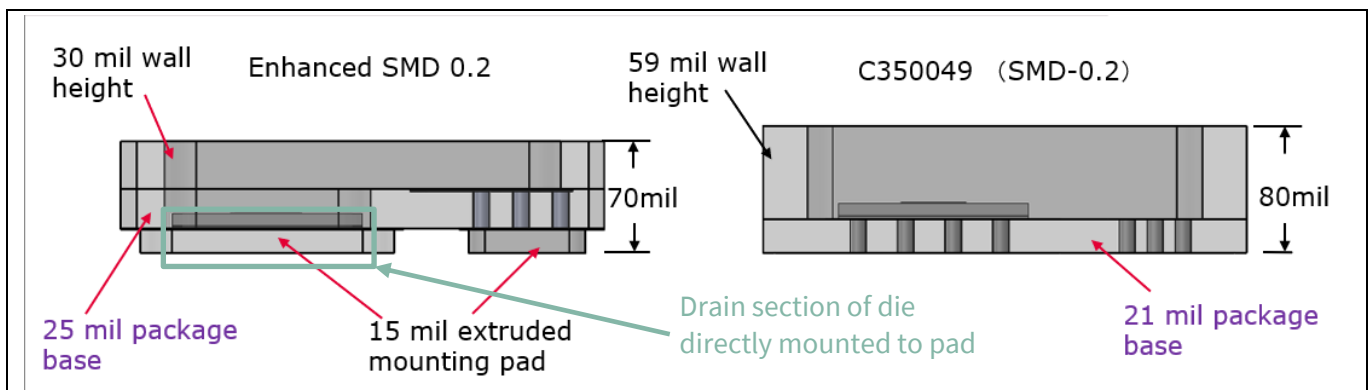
(Side view) SMD-0.2e (left) has a lower profile (10 mils shorter) than SMD-0.2 (right); die is directly mounted to the drain pad
